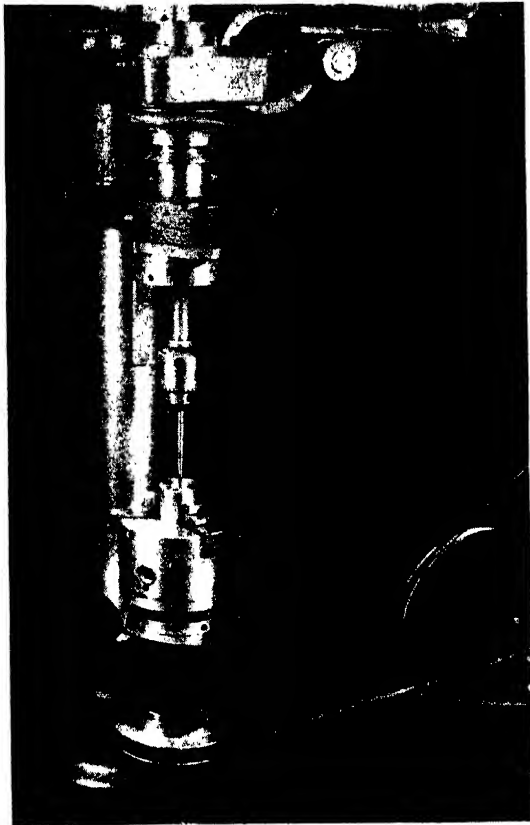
RIPPING OR REGRINDING A WIRE-DRAWING DIE
